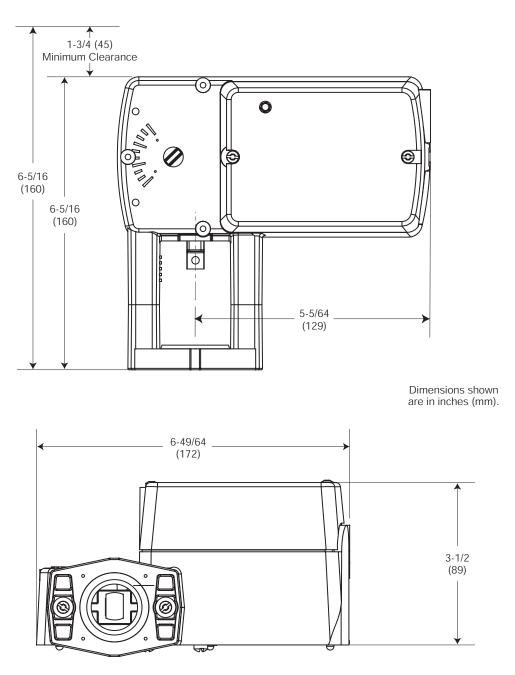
Mx51-710x Spring Return Valve Actuator Dimensions
